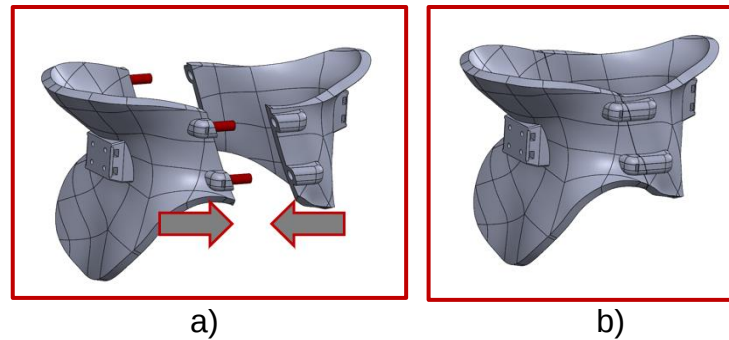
Double Figure of the Cylindrical Guides assembled to each part of the Collar: a) Cylindrical Guides movements; b) Collar closed perfectly
